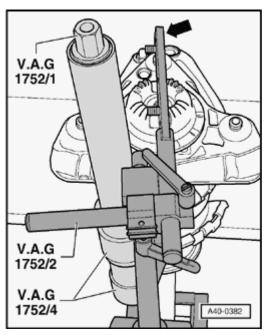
Tensioning Suspension Strut With Spring Compressor Vertically In Spring Mounting Tool V.A.G 1752/2
